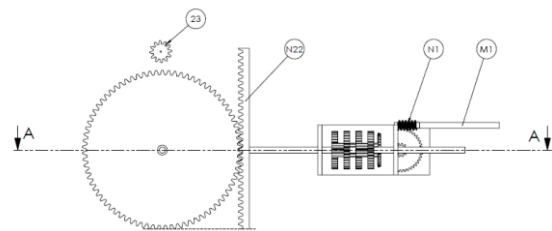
Sketch of the side by side view of the two wheels used for the dip coater. The smaller wheel has a radius eight times smaller than the larger wheel, meaning that for any given voltage its dipping speed would be eight times slower.
